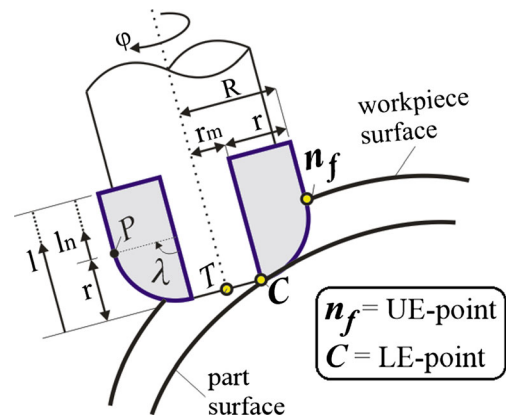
Geometry of a toroidal cutter and its cutter-part engagement points
